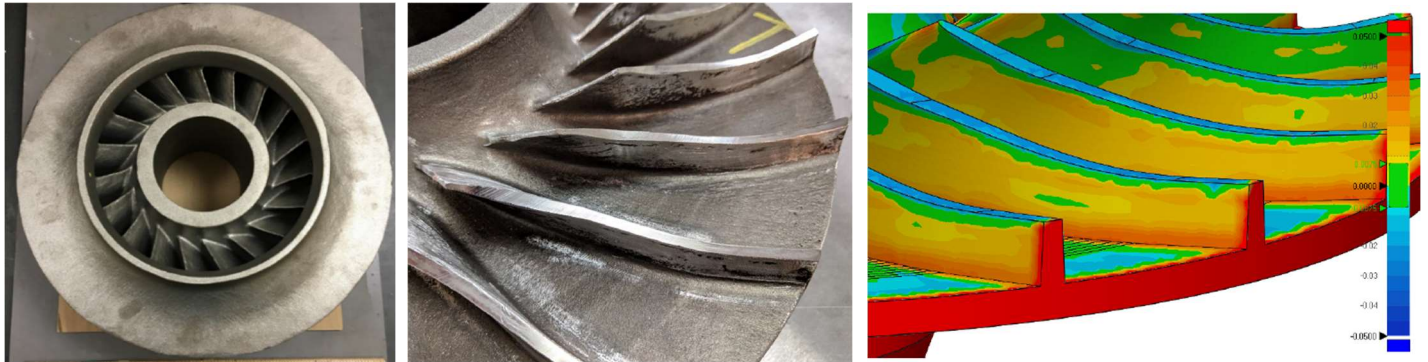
Single-piece impeller at left – Blades with cover removed in center -- Laser scan data for hybrid cast impeller blades at right
